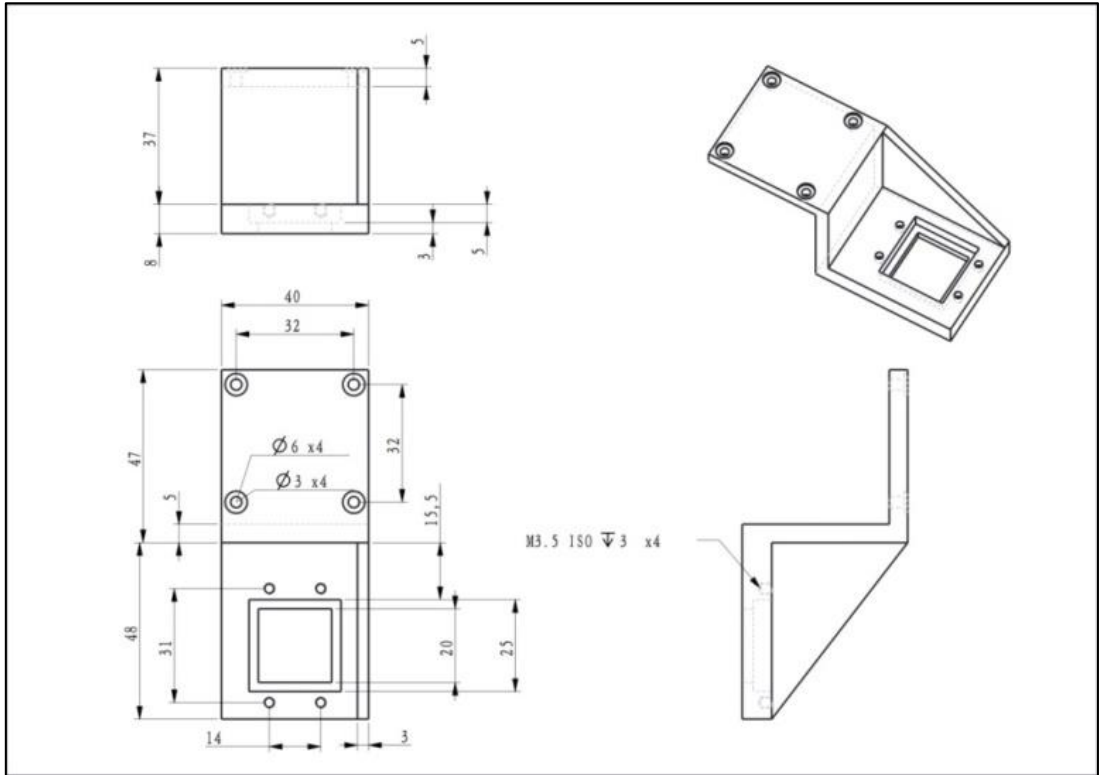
Hydrogel stamp platform; all dimensions in millimeters.
